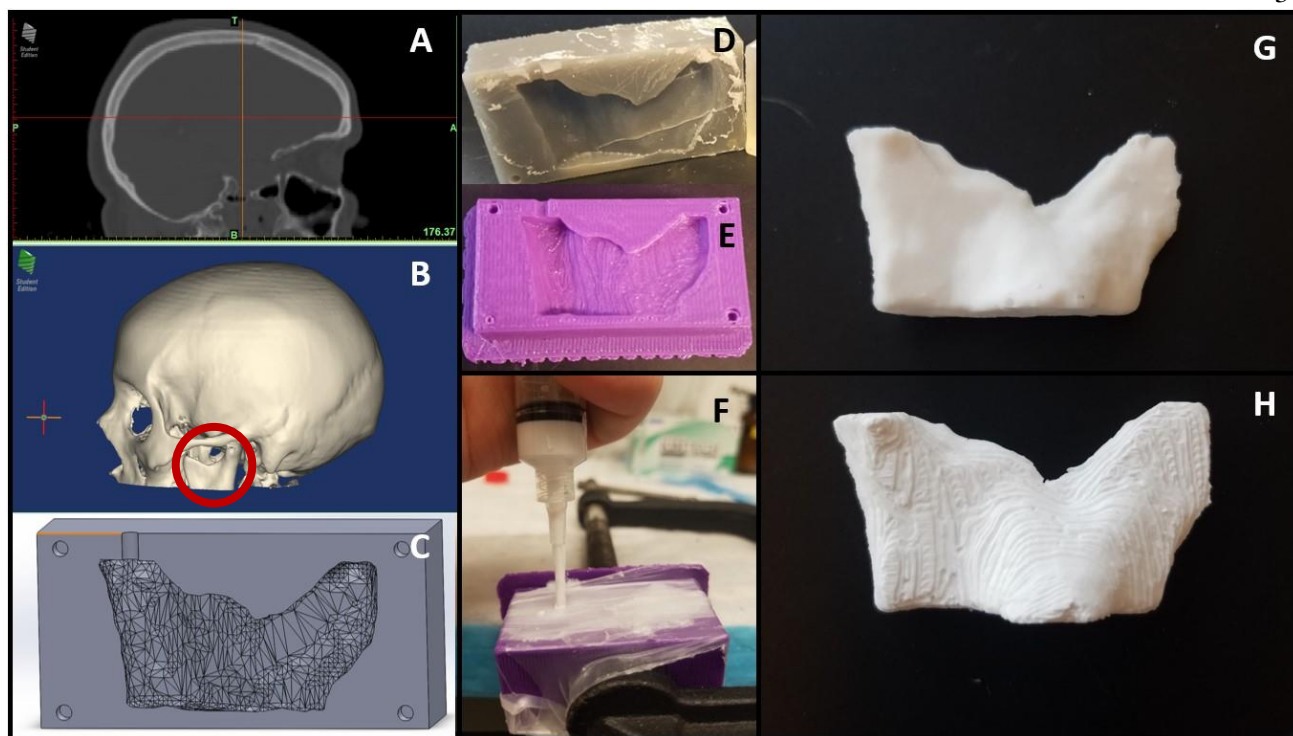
Injection Molding Workflow. Coronoid process and temporomandibular joint was extracted from scan of skull and converted into 3D printable mold. POC-MgO/HA 2.5/47.5 was molded in both 3D printed molds and retained high accuracy of the mold shape (D,E).
